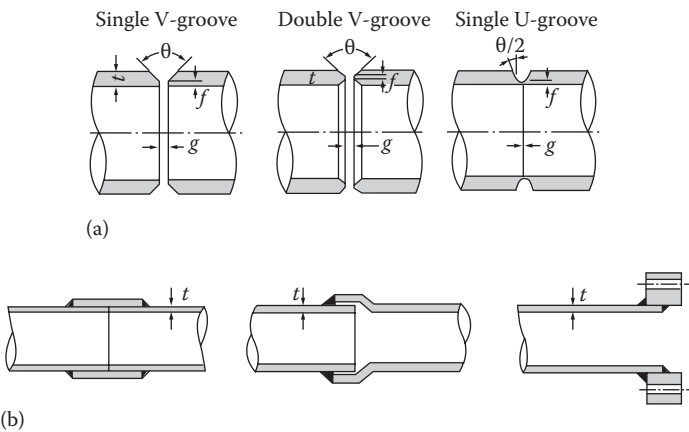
Examples of welded joints: (a) butt weld joint and (b) fillet weld joint.
